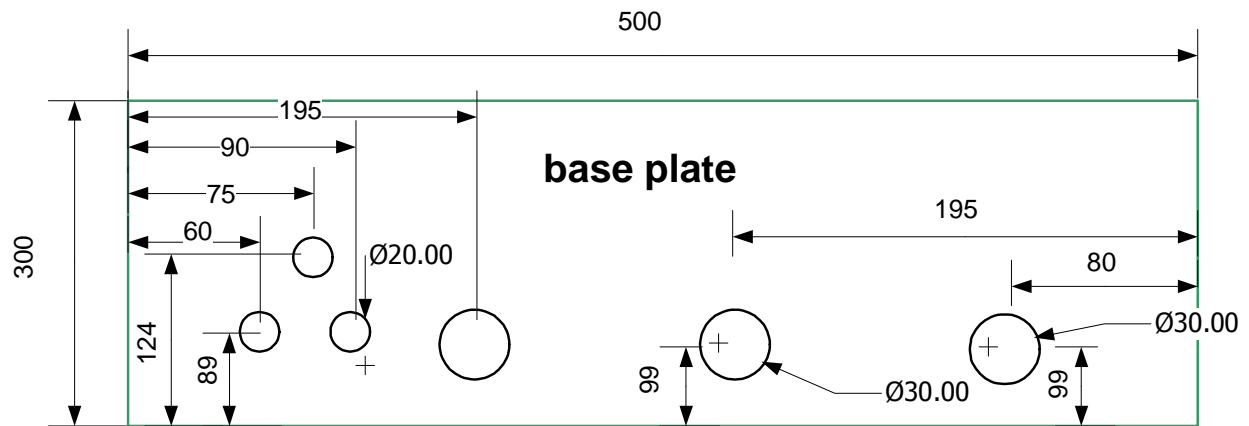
Dimensions of additional housing SecuriRAS® ASD 535
